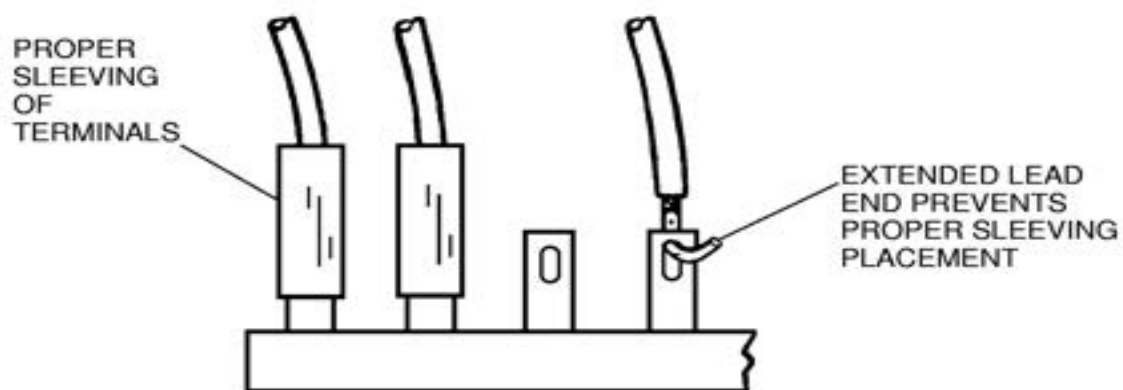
Sheet 2 : Soldering Printed Circuit Boards With Plated-Thru-Holes
